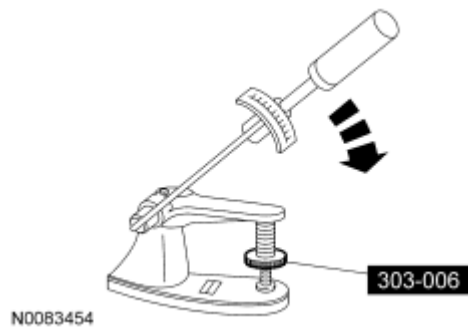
Using Valve/Clutch Spring Pressure Gauge
